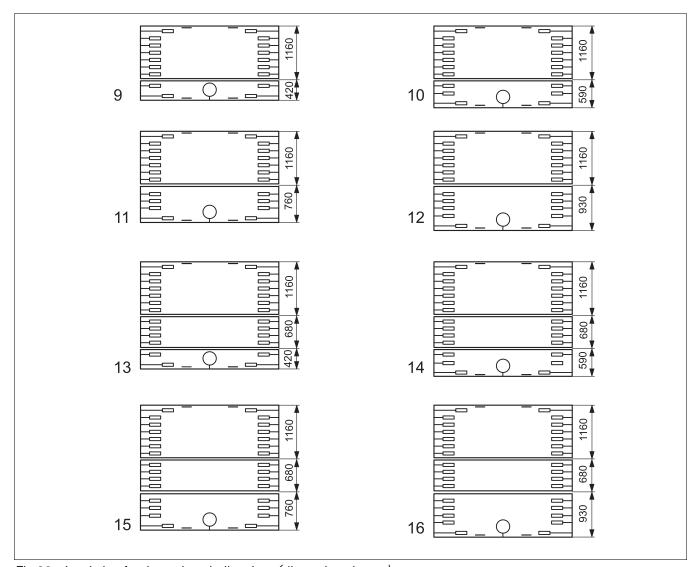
Insulation for the various boiler sizes (dimensions in mm)
